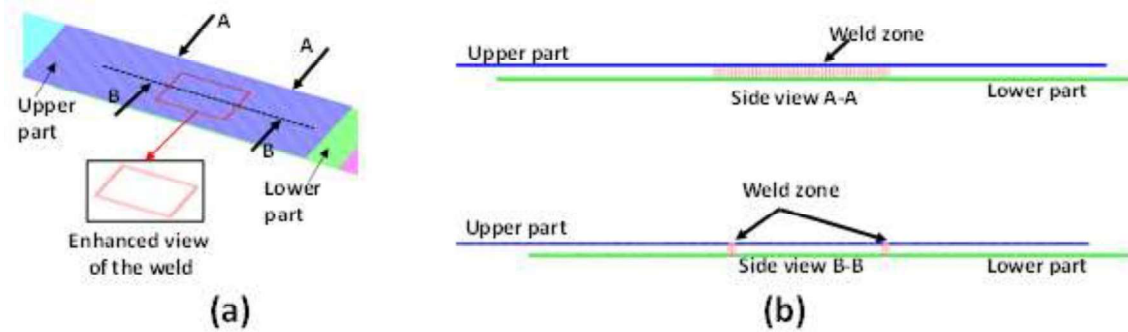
Detailed representation of mesh model (a) The joint (enlarged view) and (b) side view of the weld zone A-A and the sectional view at the middle of the weld zone B-B
